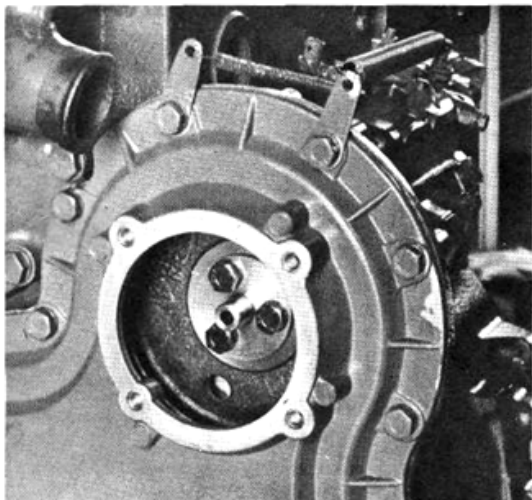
Inspection Cover Removed to Disclose Fuel Pump Gear Setscrews
